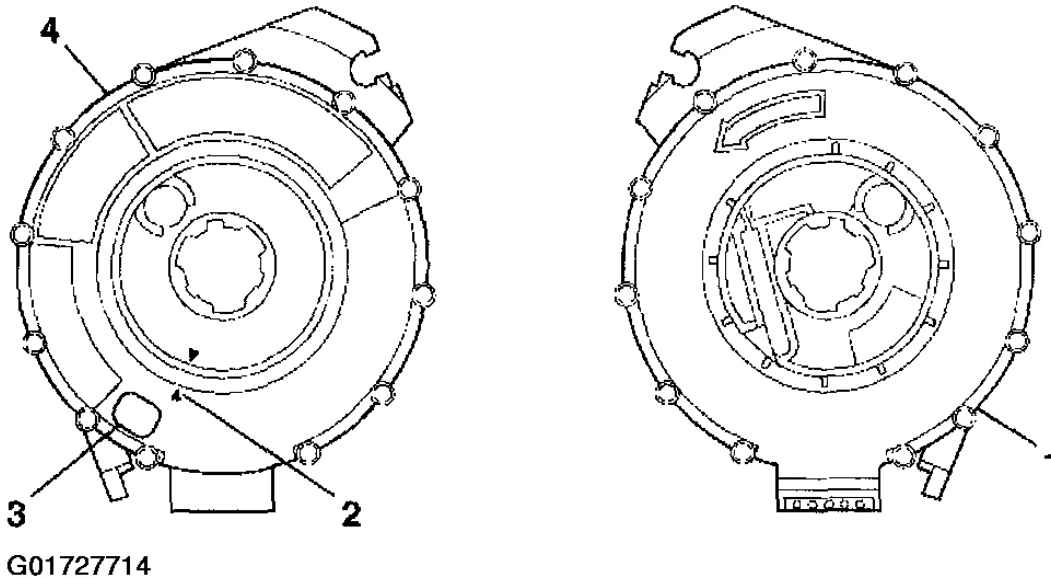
Identifying Inflatable Restraint Steering Wheel Module
